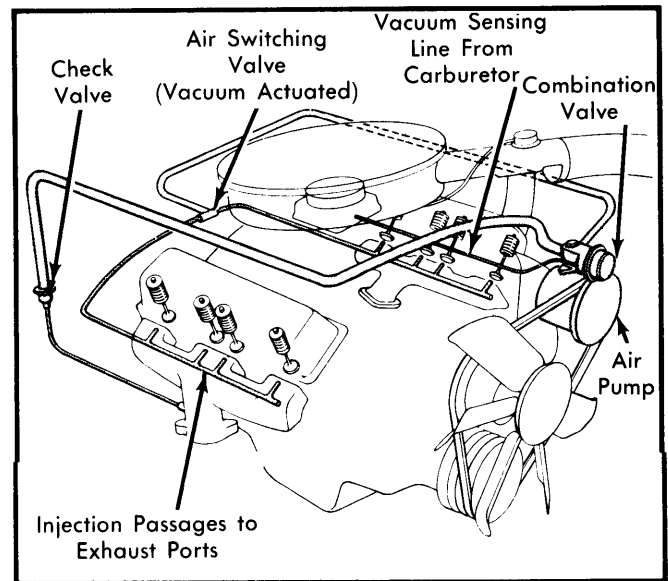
Air Pump Injection System (8-Cyl. Engine Shown)
